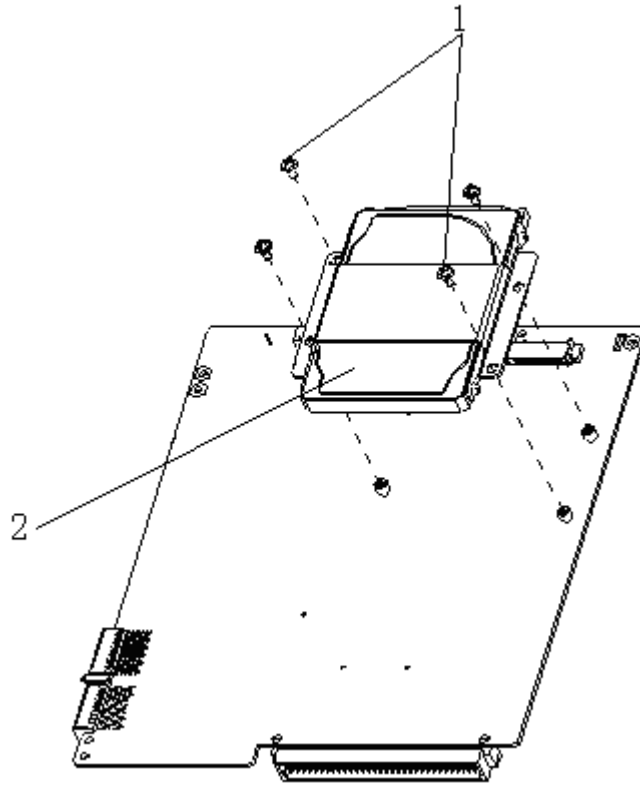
Sketch Map of Harddisk Disassembly (1)
